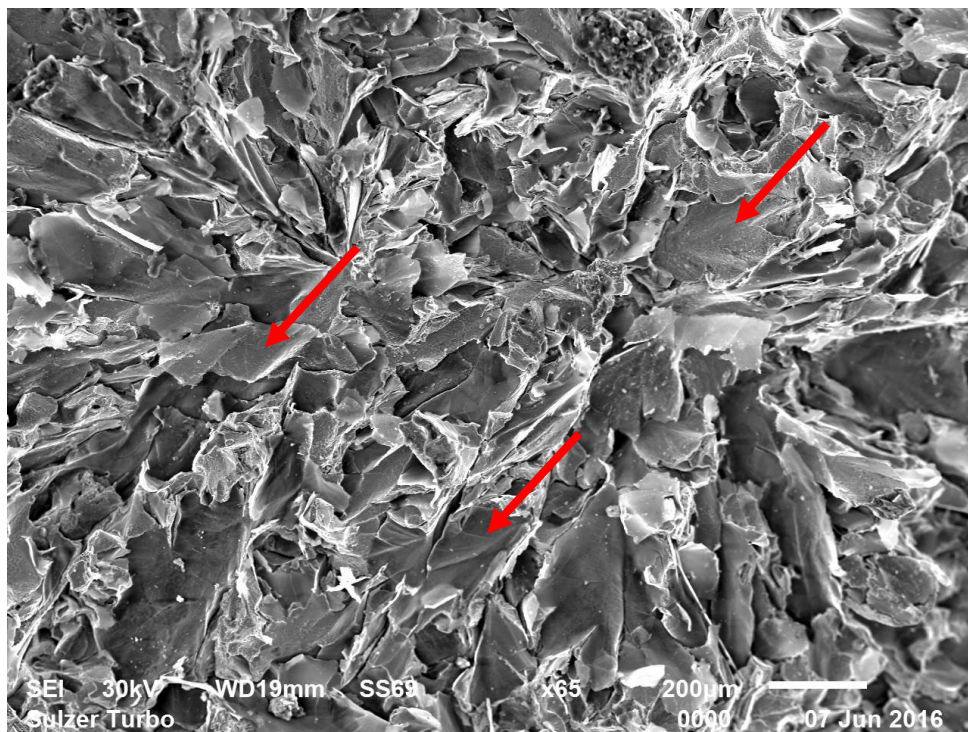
SEM image showing cleavage fracture in a cast part used in a steam turbine.
